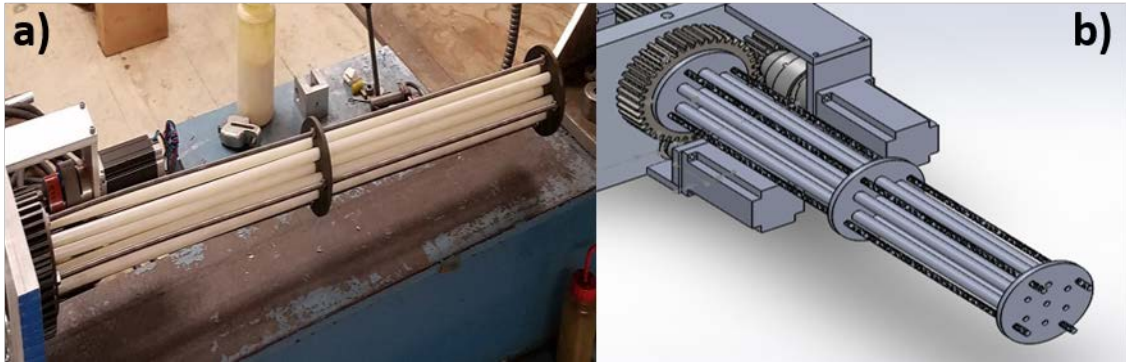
Rotating wire feeder part of the wire braiding test setup (a) built and (b) preliminary 3D SolidWorks model.
